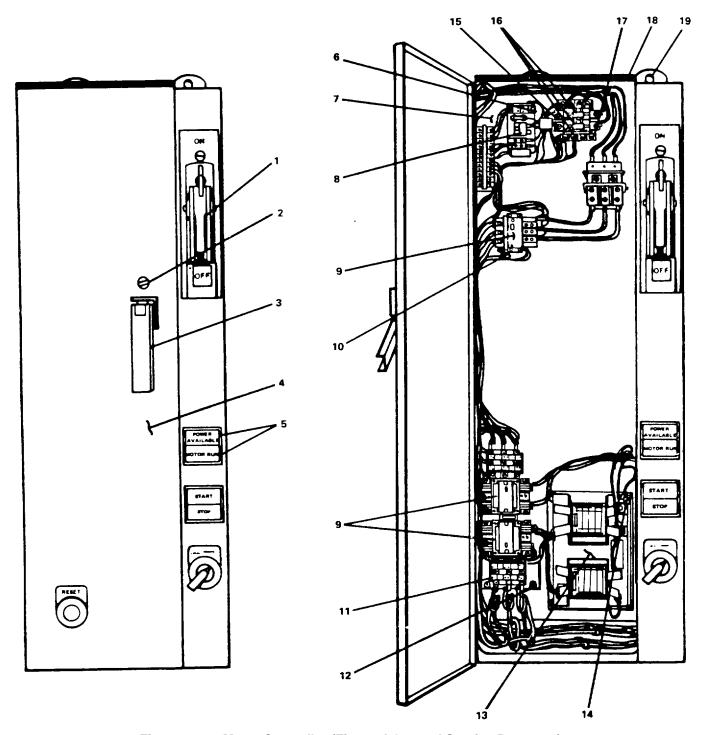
Motor Controller (Fire and General Service Pump # 1).
